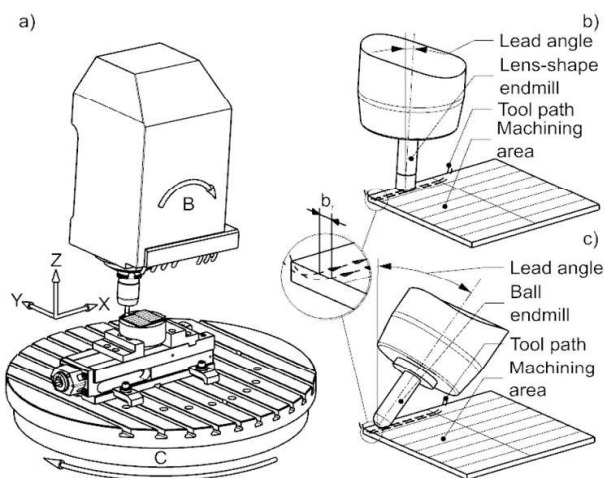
Scheme of a) machine tool configuration, b) lens-shape end mill machining, c) ball end mill machining
